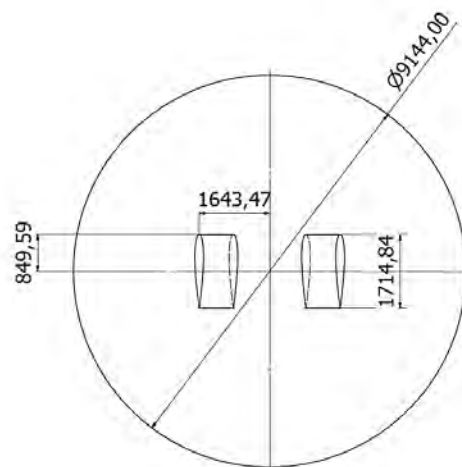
AWACS radar bottom-view dimensions in millimetres
